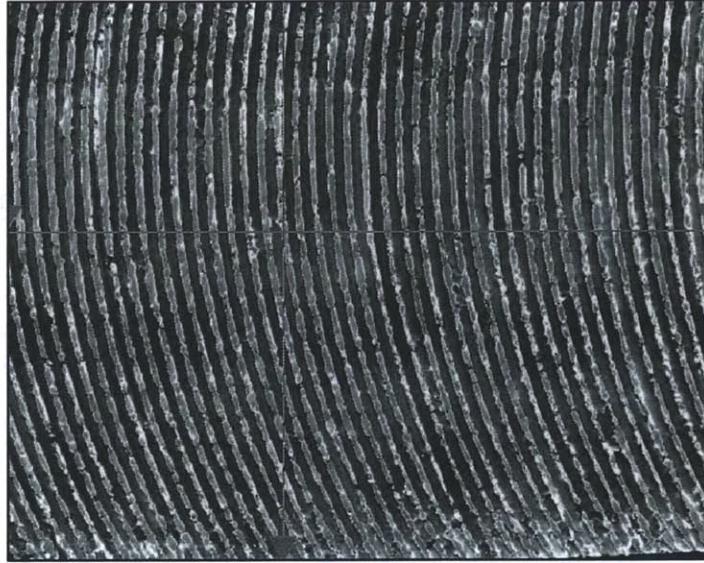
Interferometer Scan of Tool Marks on a Micro machined Tool
